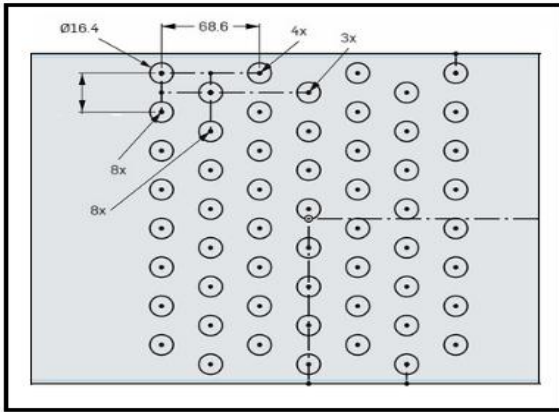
Proposed Heat Exchanger Pattern for wind tunnel
